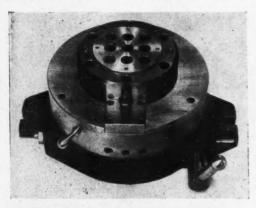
This standard Larrad hydraulic clamping fixture holds nine components, and has an indexing movement of 90 deg.
